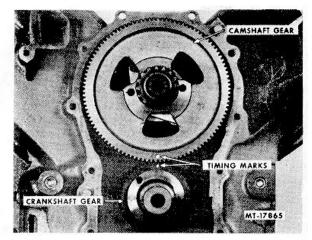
Aligning Timing Marks on Camshaft and Crankshaft Gears
